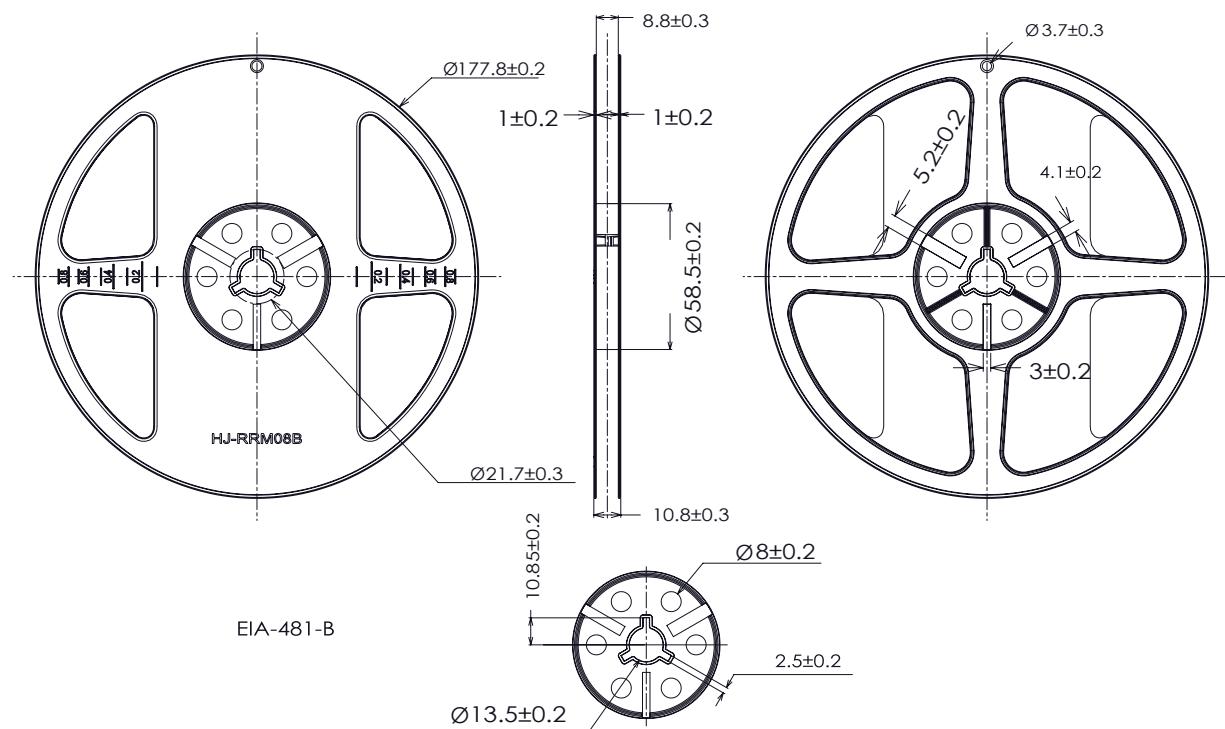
Reel dimensions for LUXEON 2835 with FreshFocus Technology.
